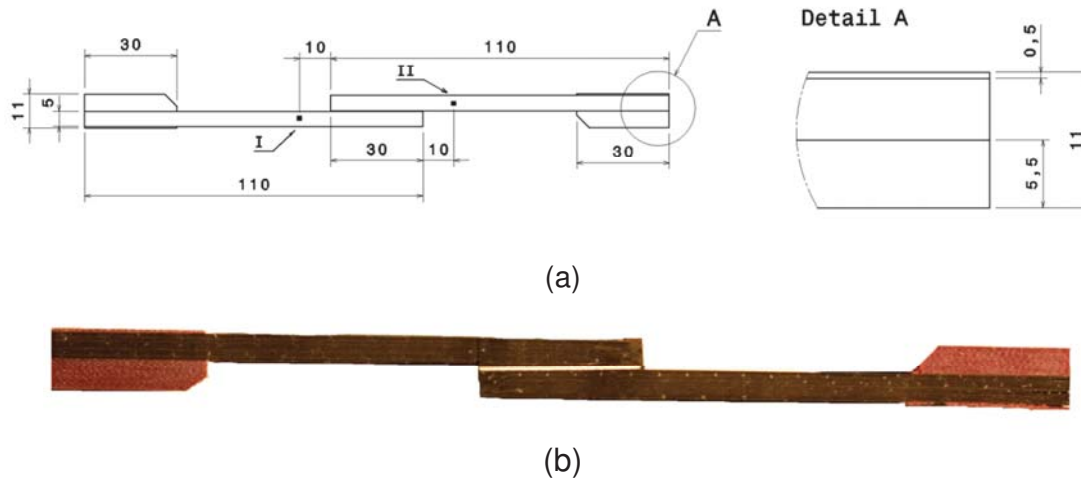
SLS specimen: (a) sectional view of the specimen, (b) final SLS joint specimen.
